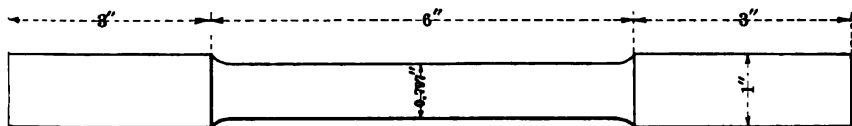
SHAPE AND DIMENSIONS OF TEST PIECES.
